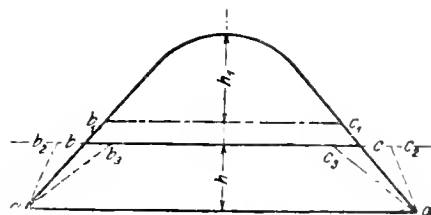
DEVELOPED PROJECTION OF A CAM FOR THE VALVE SHOWN IN FIG. 3
